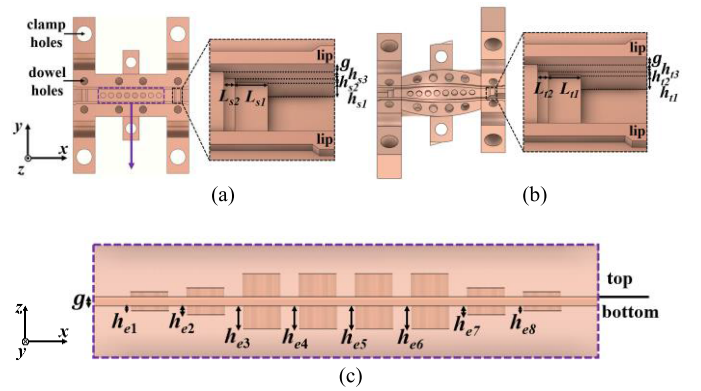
EBG filter design integrated into a waveguide. (a) Plan view of thru. (b) Plan view of twist. (c) Side view of thru showing the hollow cavities.
